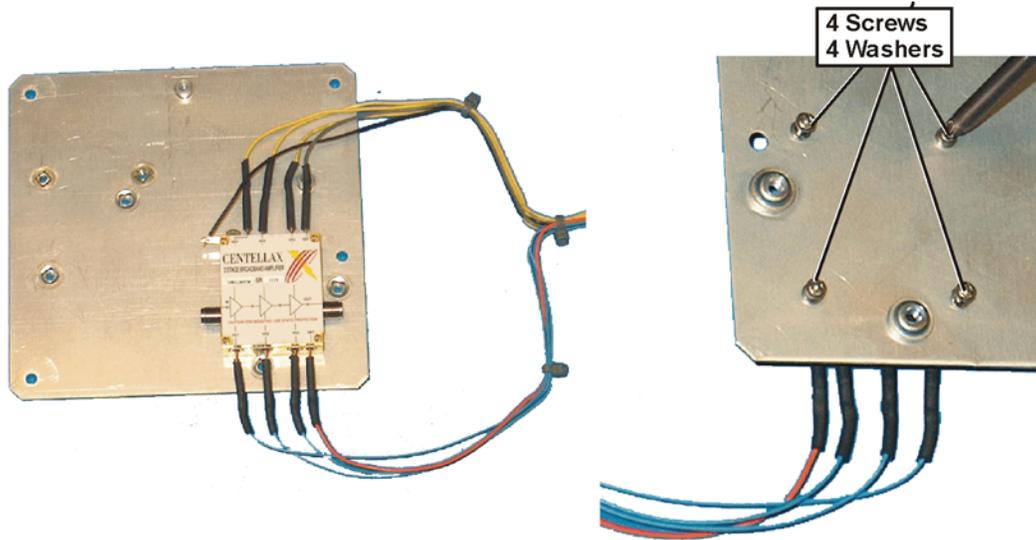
Attaching the Cable Assembly to the Amplifier
